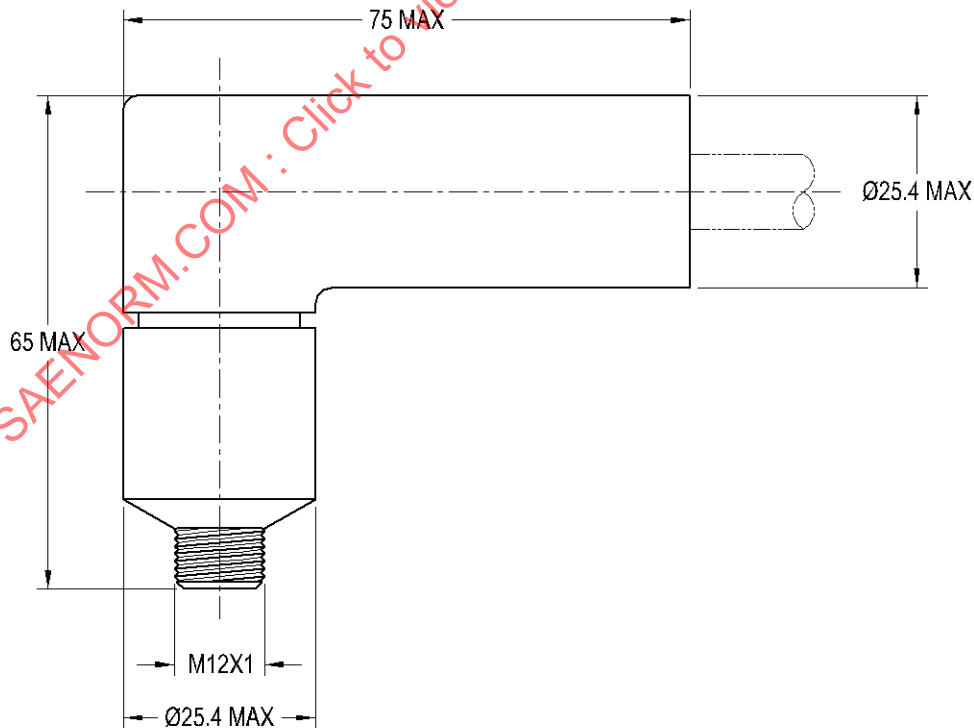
HDM12 RIGHT ANGLE MALE ENVELOPE DRAWING
